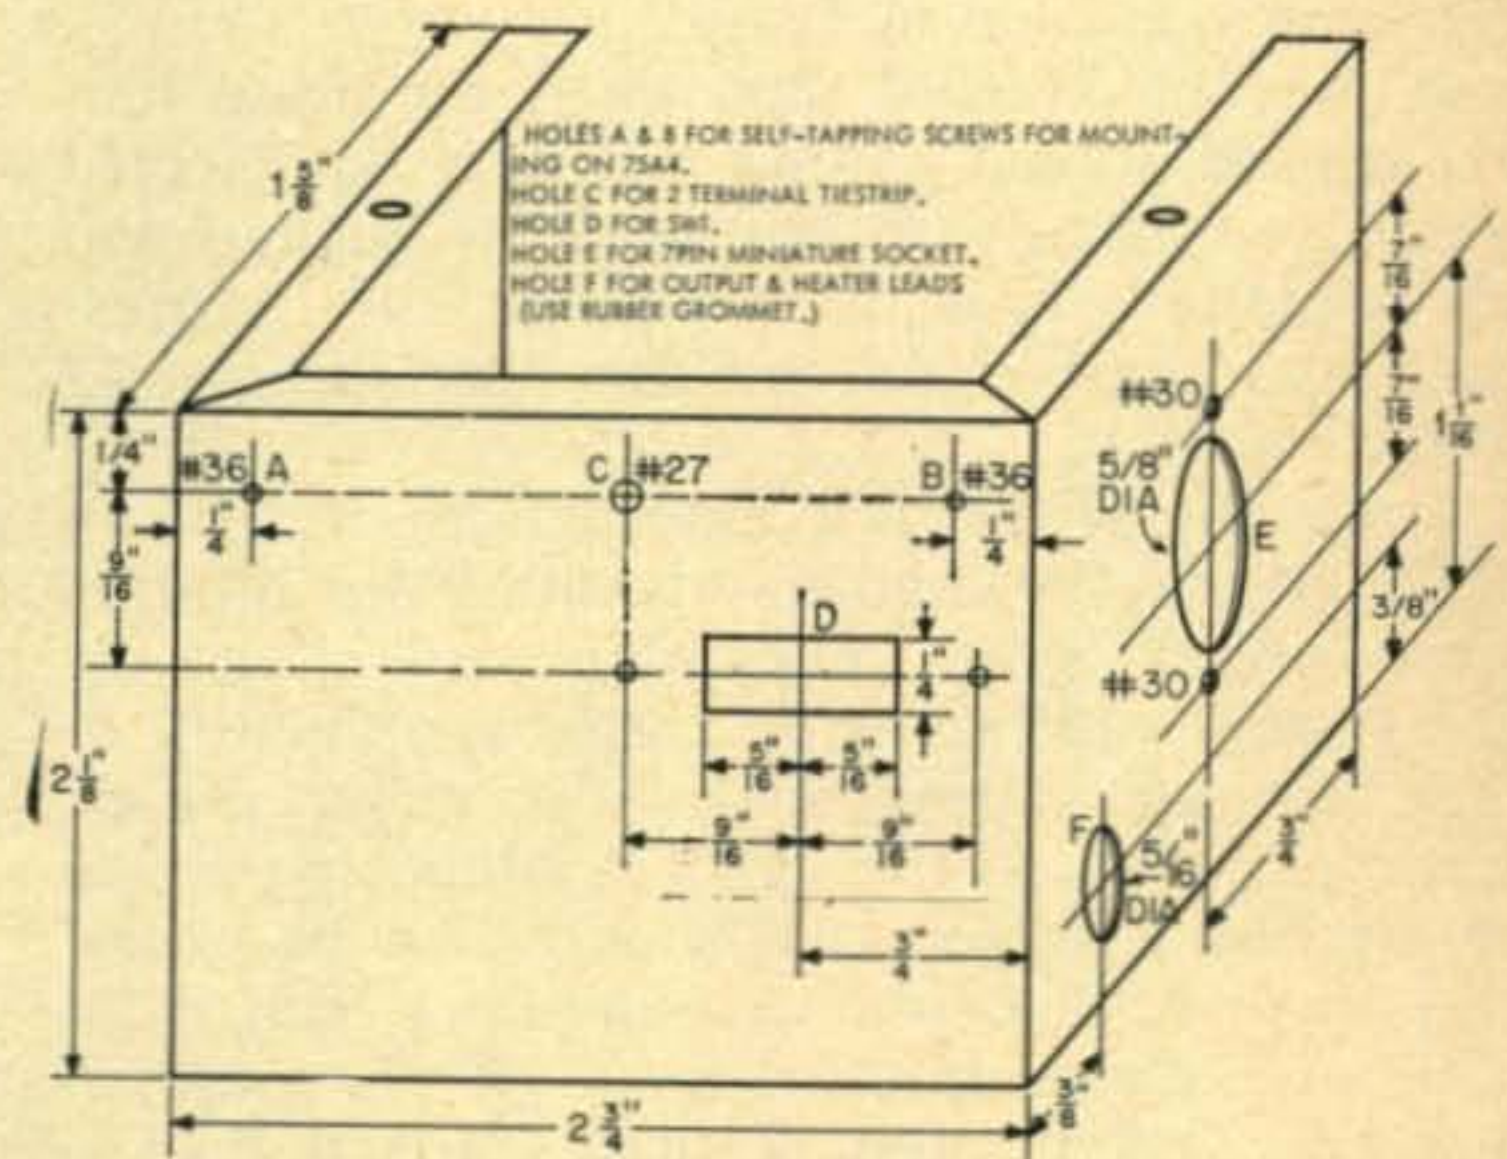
Location and dimensions of holes for the construction of the IFNL.
